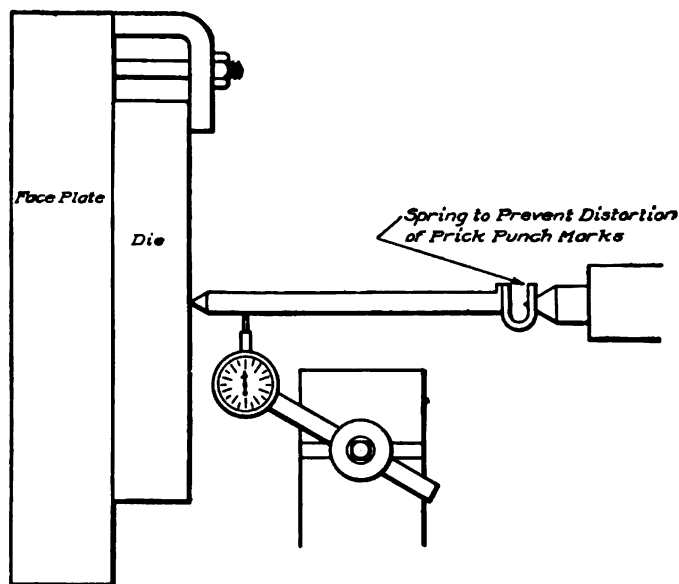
Method of Locating and Indicating Prickpunch Mark
